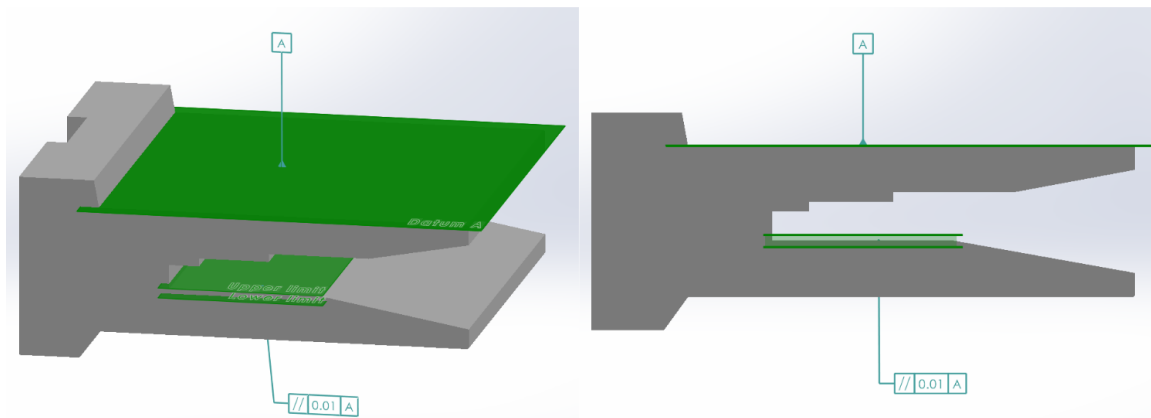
Visualization of parallelism geometrical tolerance
